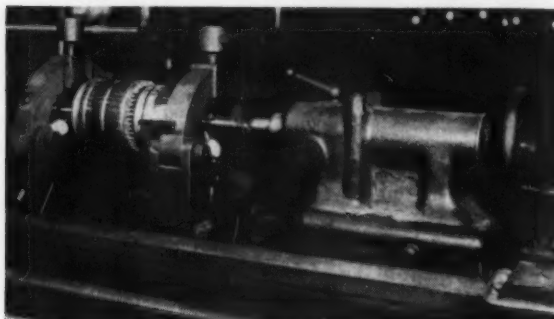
Special setup built on old lathe for straightening motor armature shafts.
